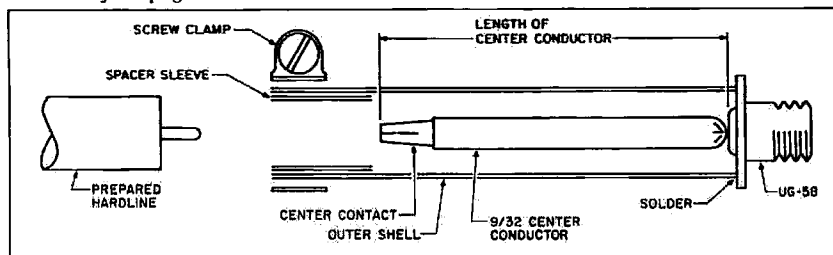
Cutaway of 1/4 wave impedance converter, showing all parts of the completed unit.
